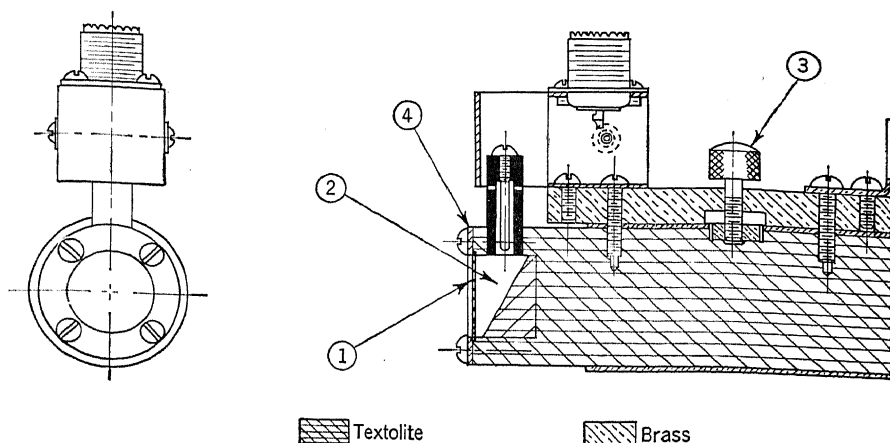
Crystal assembly for Line A. (1) A 10-Mc/sec crystal, plated on the front side, is lacquered to Textolite piece. (2) This space holds the backing mercury. The main part of the assembly slides inside a tube containing the water. (3) This screw elevates the piece into which it is threaded and so holds the assembly fixed in the tube. Wire leads connect the uhf fitting to the mercury well and to the (grounded) clamp ring (4).
